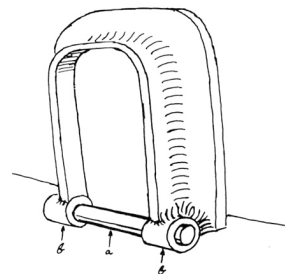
CRANK ARRANGEMENT BEFORE ASSEMBLY
